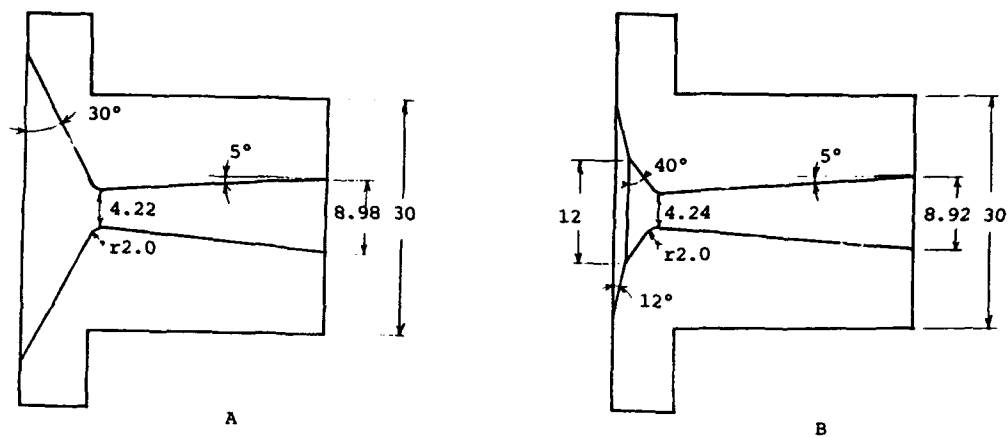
Mach 3 nozzles. All dimensions in mm.
